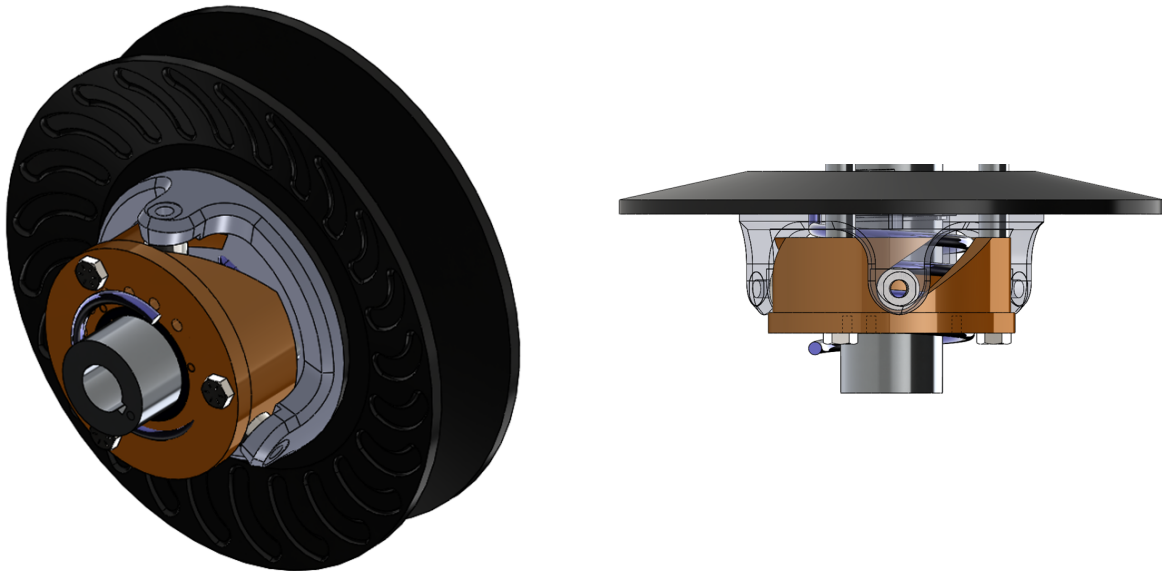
Secondary CVT pulley assembly. Left: exterior view. Right: cross-sectional view showing torque-feedback helix mechanism (bronze) and torsional spring (black). Transmitted torque generates a rotational reaction in the helix, which produces axial clamping force proportional to load.
